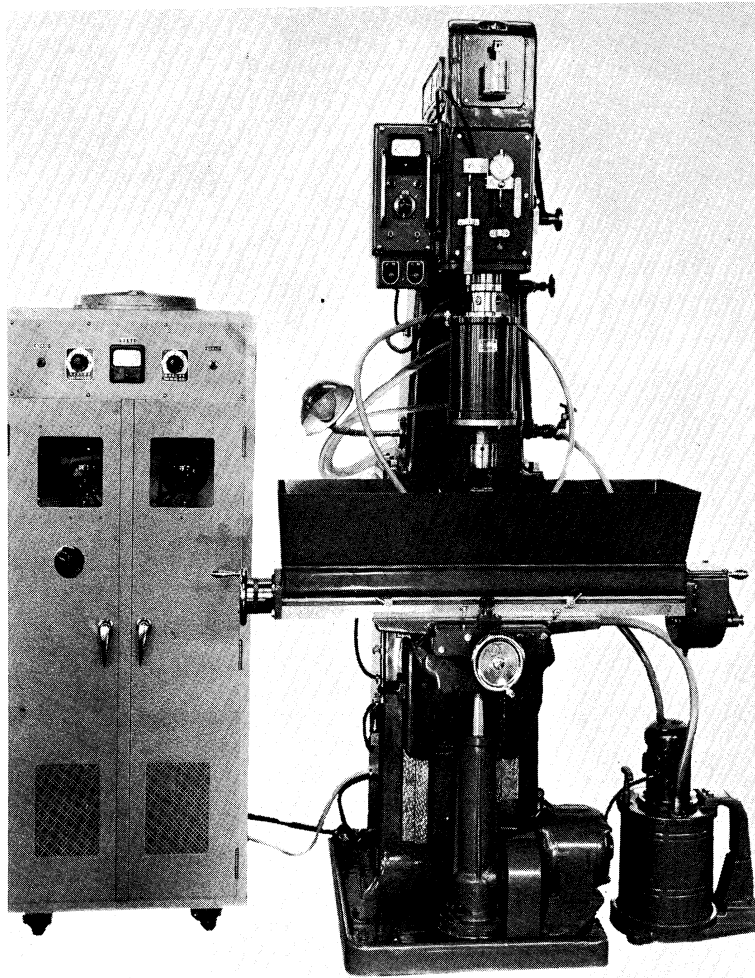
Ultrasonic Machine, by Shimada Physical and Chemical Industrial Company, Ltd.
